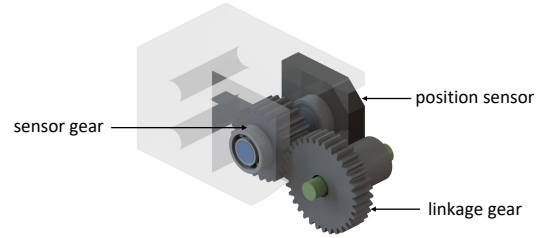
CAD model of the gear box with the position sensor to create a more accurate measurement.
